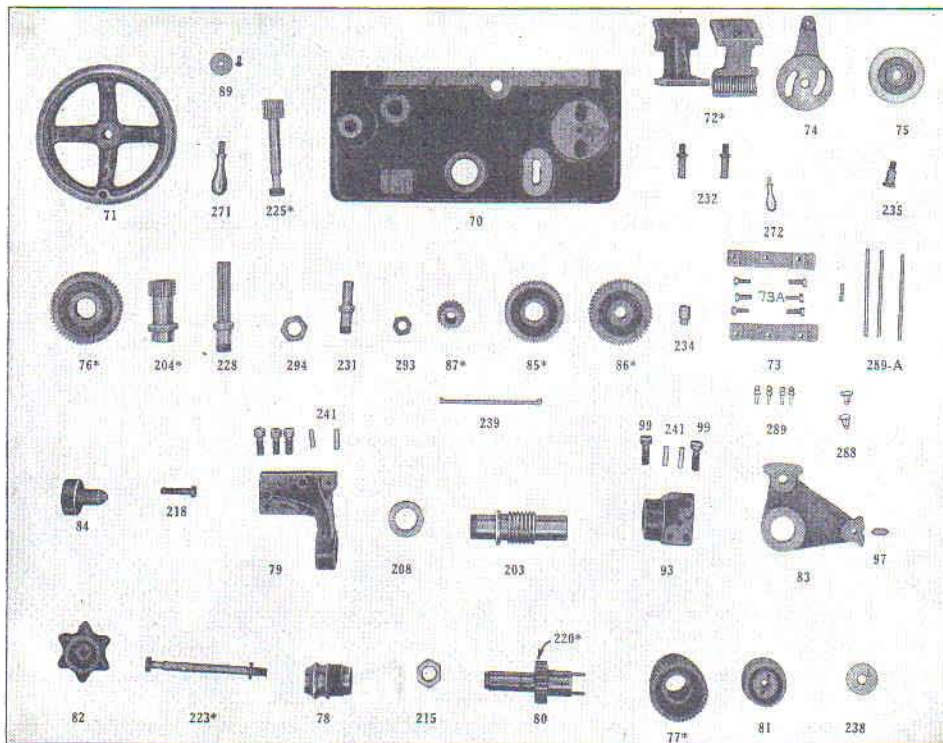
Apron Parts for Series "O" Quick Change Gear and Standard Change Gear Lathes.
